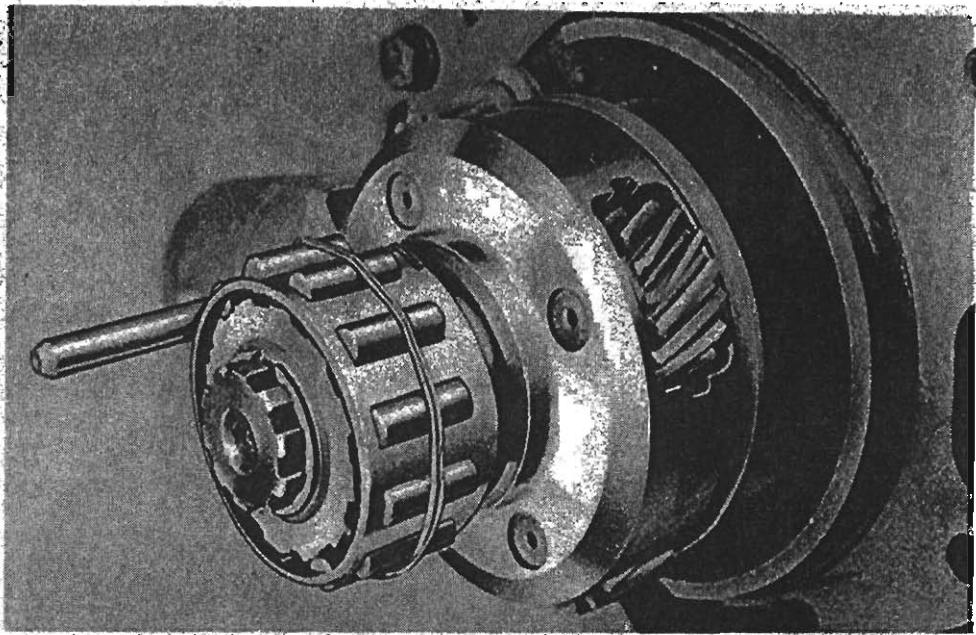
Install the Pinion Cage Retaining Snap Ring.
